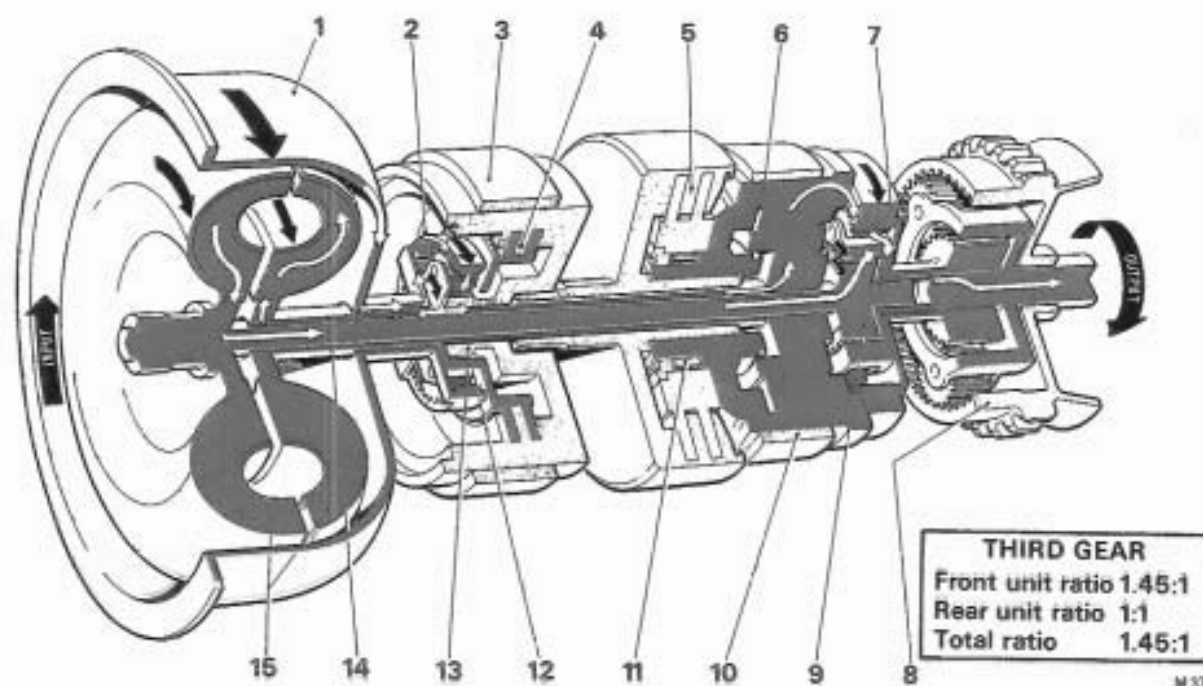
LINE OF DRIVE IN 3rd GEAR
